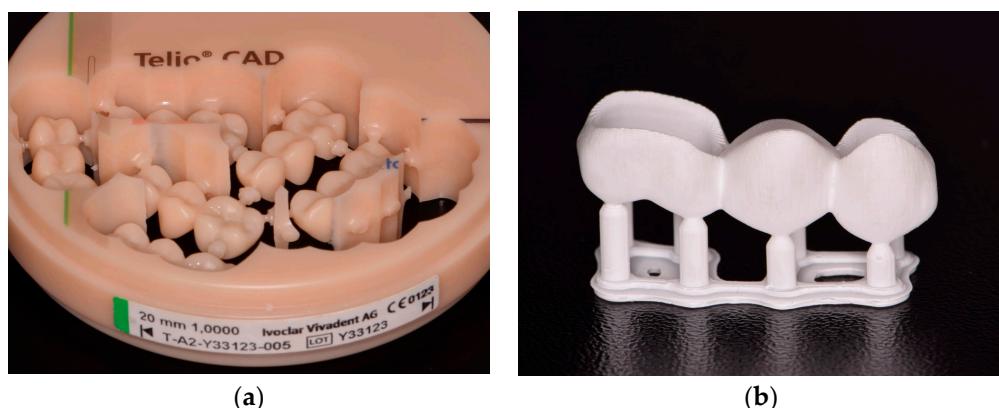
(a) PMMA milled samples immediately after removal from the milling unit, (b) 3D-printed polymer samples immediately after removing from the 3D printer.
